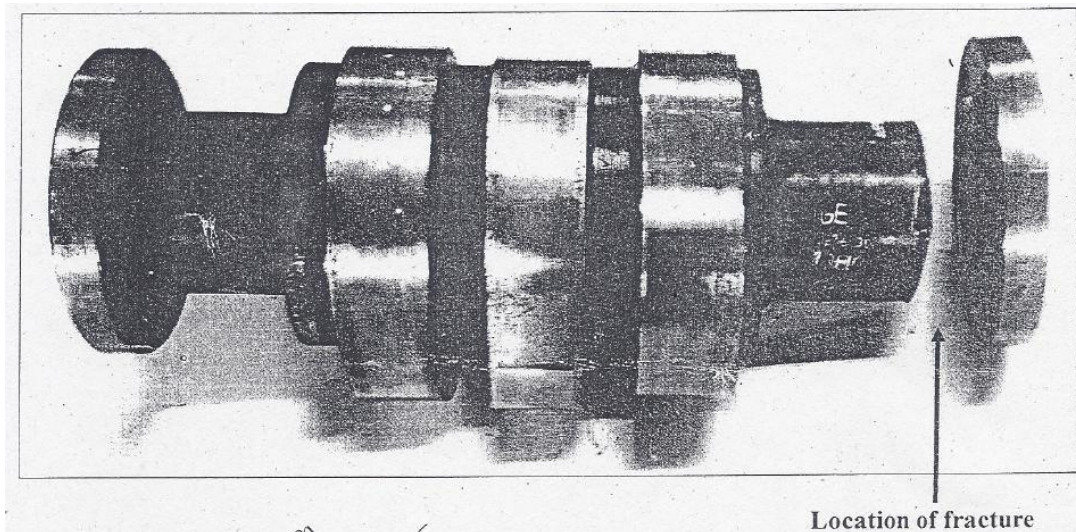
Typical Location of Camshaft Flange Breakage Due to Fatigue ⁽²¹⁾
